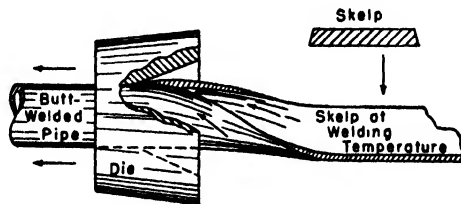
A common method of curling and butt-welding pipe.
